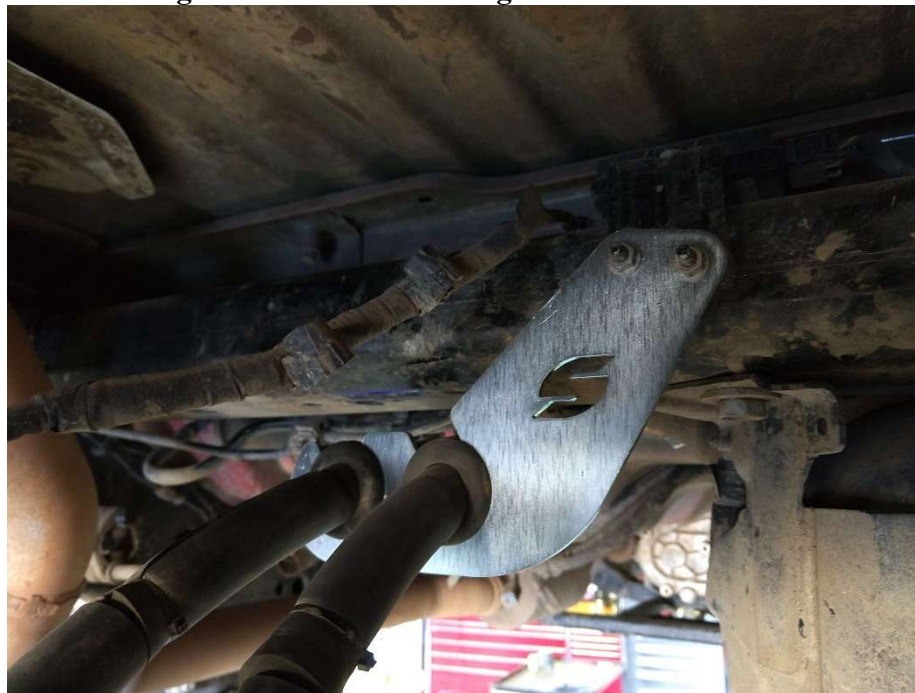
Synergy Parking Brake Cable Bracket Installed
